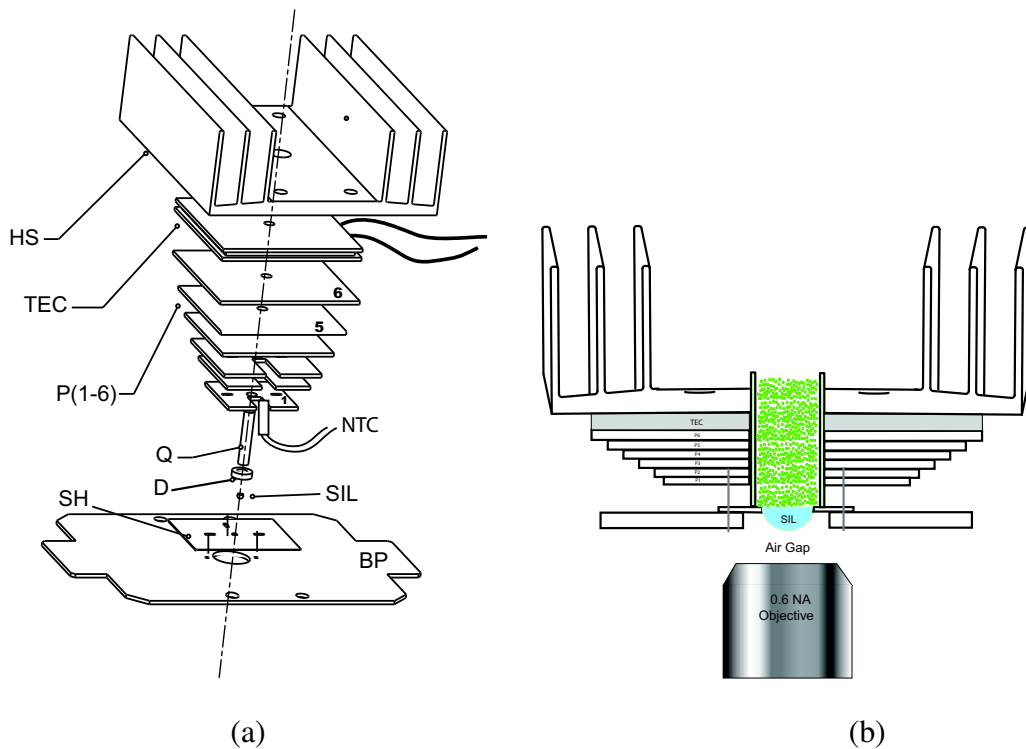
Schematic of the SIL temperature module. a) Exploded view of SIL Temperature Module and b) Complete Assembly. BP, Base plate; SH, Alumina Foil SIL holder ( $170\mu m$ ); SIL, Solid Immersion Lens; D, Circular Disc; Q, Quartz tube; NTC, Thermistor; P(1-6), Alumina Pyramid glued together from individual alumina plates of varying dimensions for effective heat transfer; TEC, Thermo Electric Cooler or Annular Peltier element; HS, Heat sink. b) Vertical cross-section of the module with respect to microscope body (dimensions not to scale).
